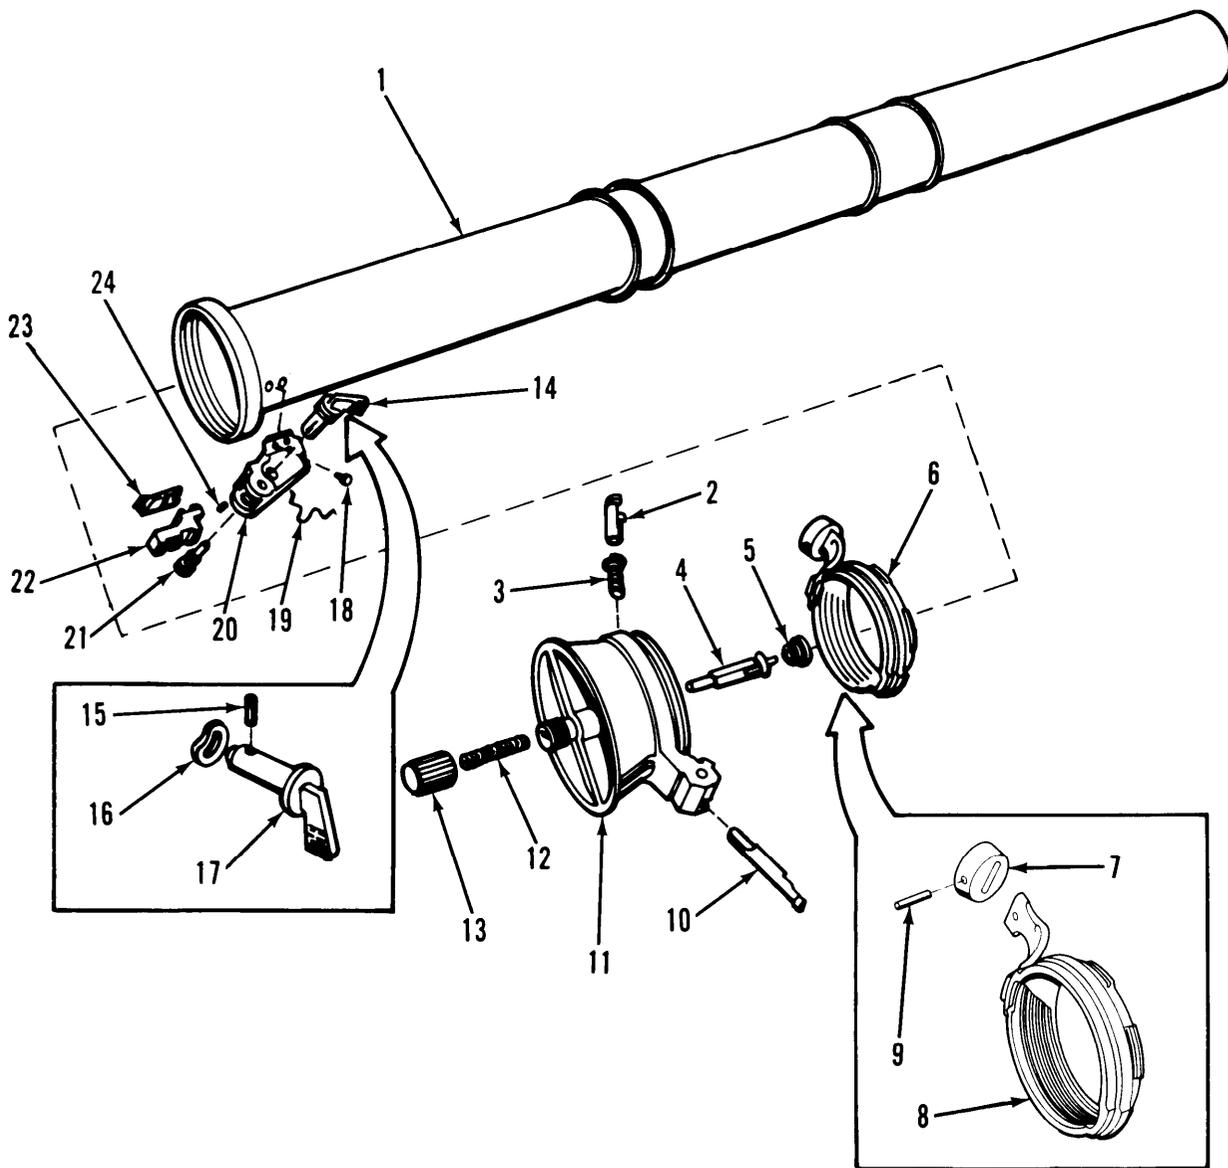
90-mm Recoilless Rifle M67 (Breechblock) and Safety Assembly and Lock Ring Assembly
